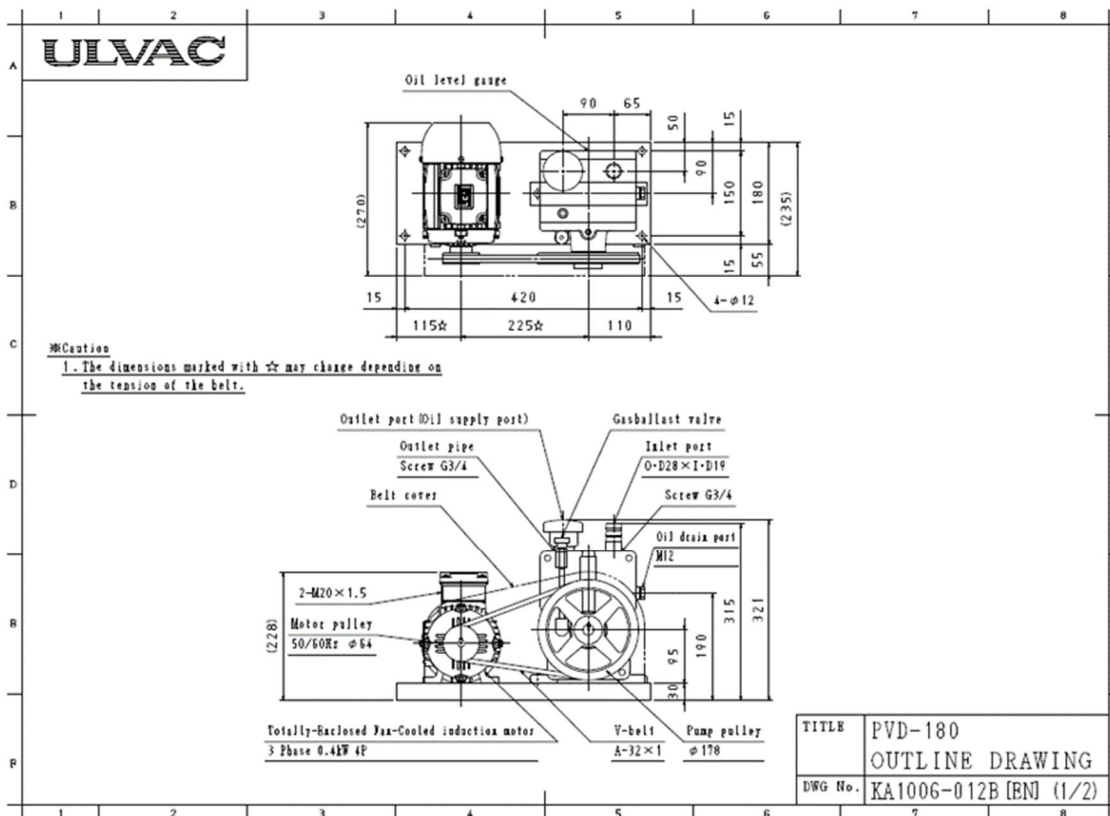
Dimensional drawing PVD-180, PVD-180K
